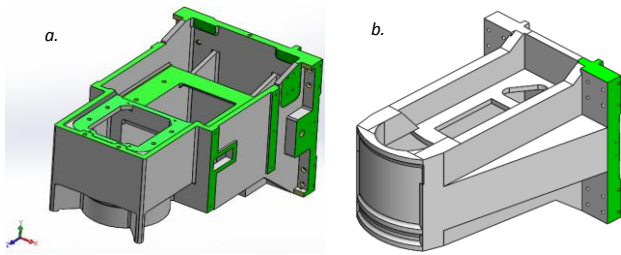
a.* Existing 3D model of a spindle head, *b.* Version-1: modified spindle head design based on experimental and predicted FRF feedback
